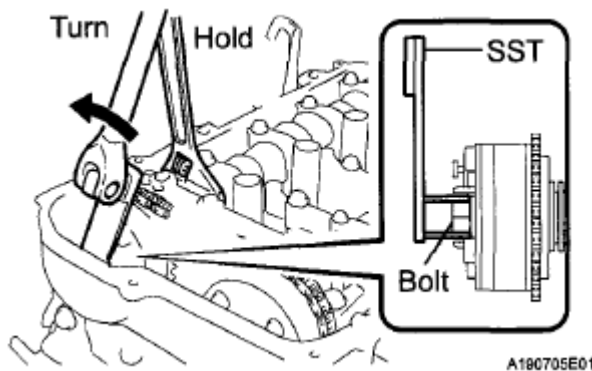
Removing Camshaft Timing Exhaust Gear Assembly
